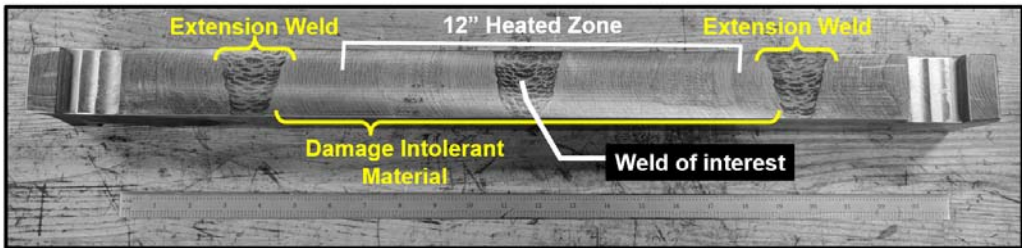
Machined sample with extension welds in damage intolerant material
